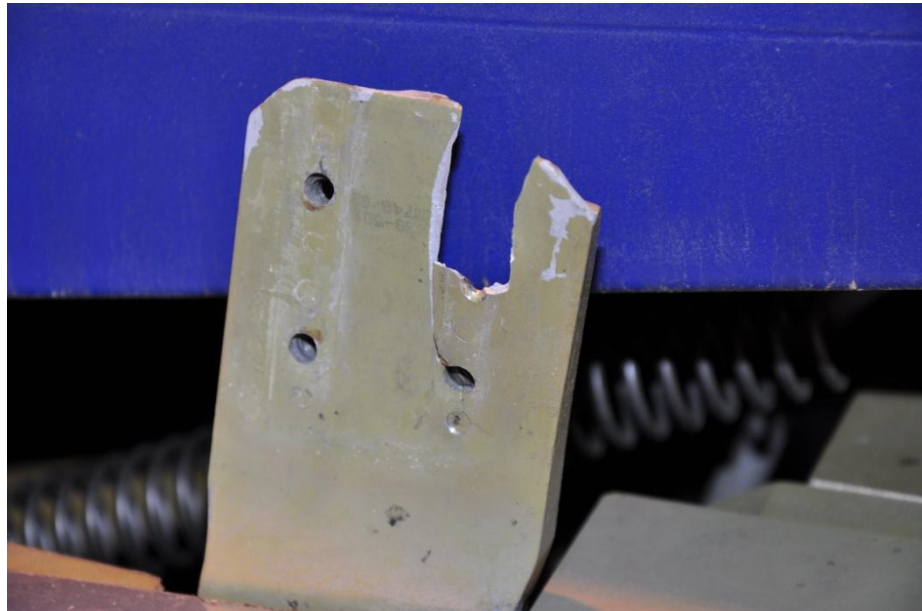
The failed bracket, showing outward bending and failure of the metal around the screw hole.
